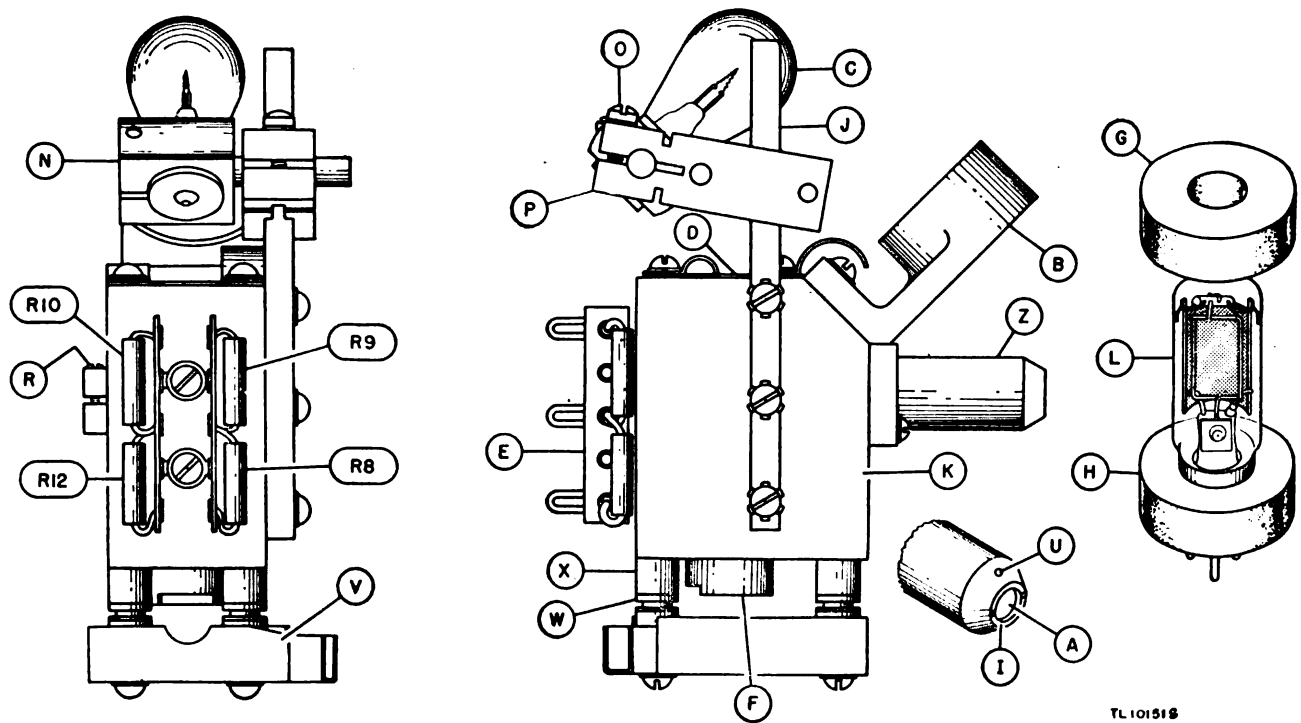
Transmitter optical system, 80 series, part of original equipment.
